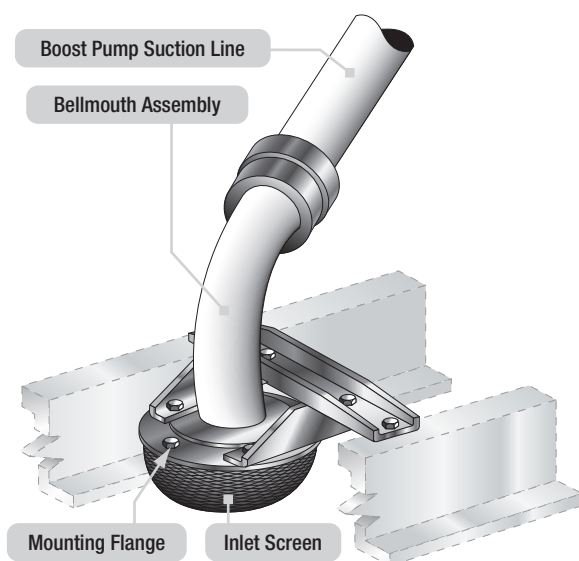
A typical fuel boost pump inlet screen installation for a centrifugal pump mounted outside of the bottom of the tank.
